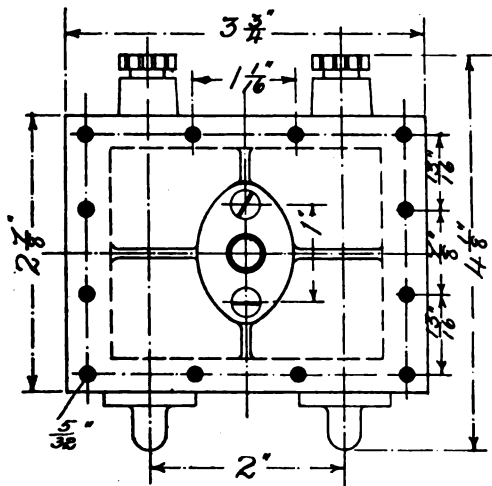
PLAN OF CYLINDERS, SHOWING ARRANGEMENT OF STEAM CHEST. (Half full size.)
